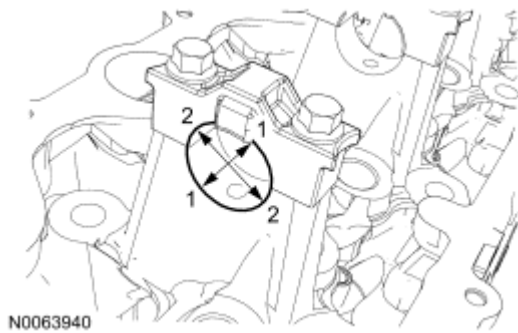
Measuring Camshaft Bearing In 2 Directions
